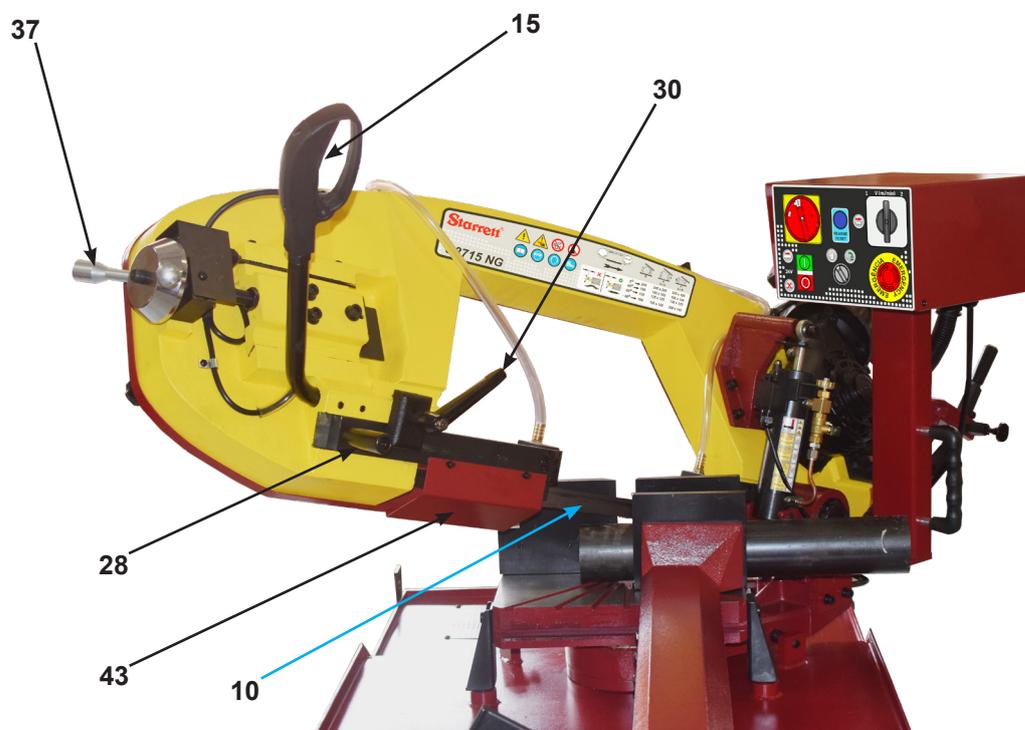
MOBILE GUIDE SUPPORT
